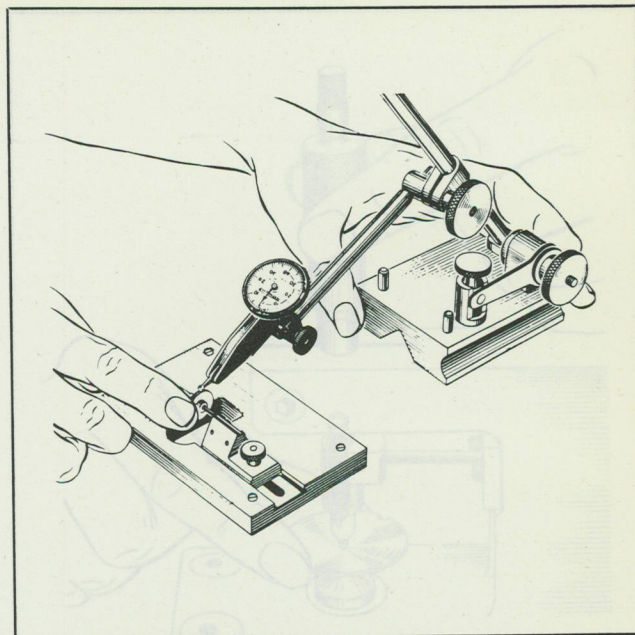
L—Checking Concentricity of Magnesy Shaft Assembly
